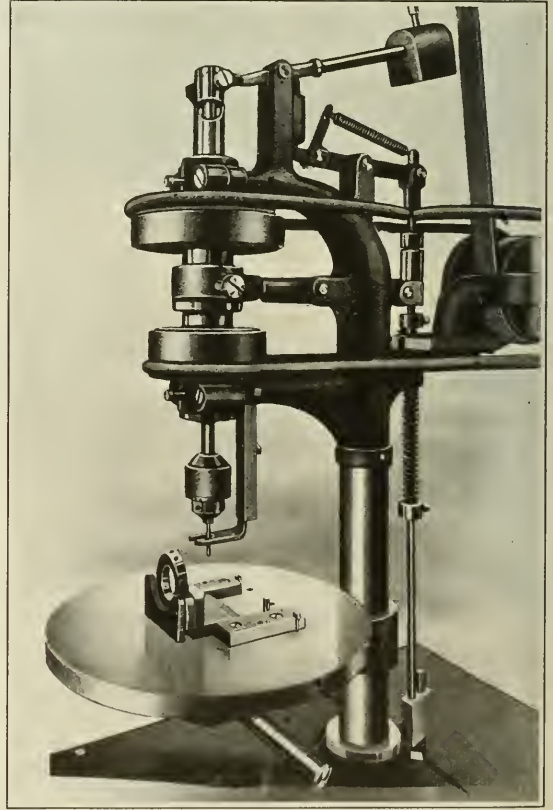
Machine and V-block Fixture used for tapping Setting Pin Hole
